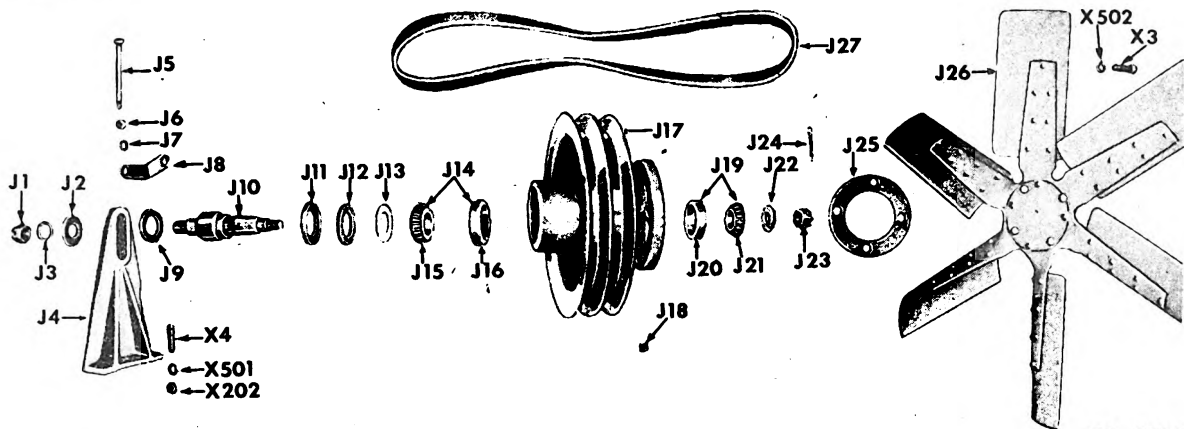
Fan Assembly (DE-41873) 26" 6 Blade Pusher
